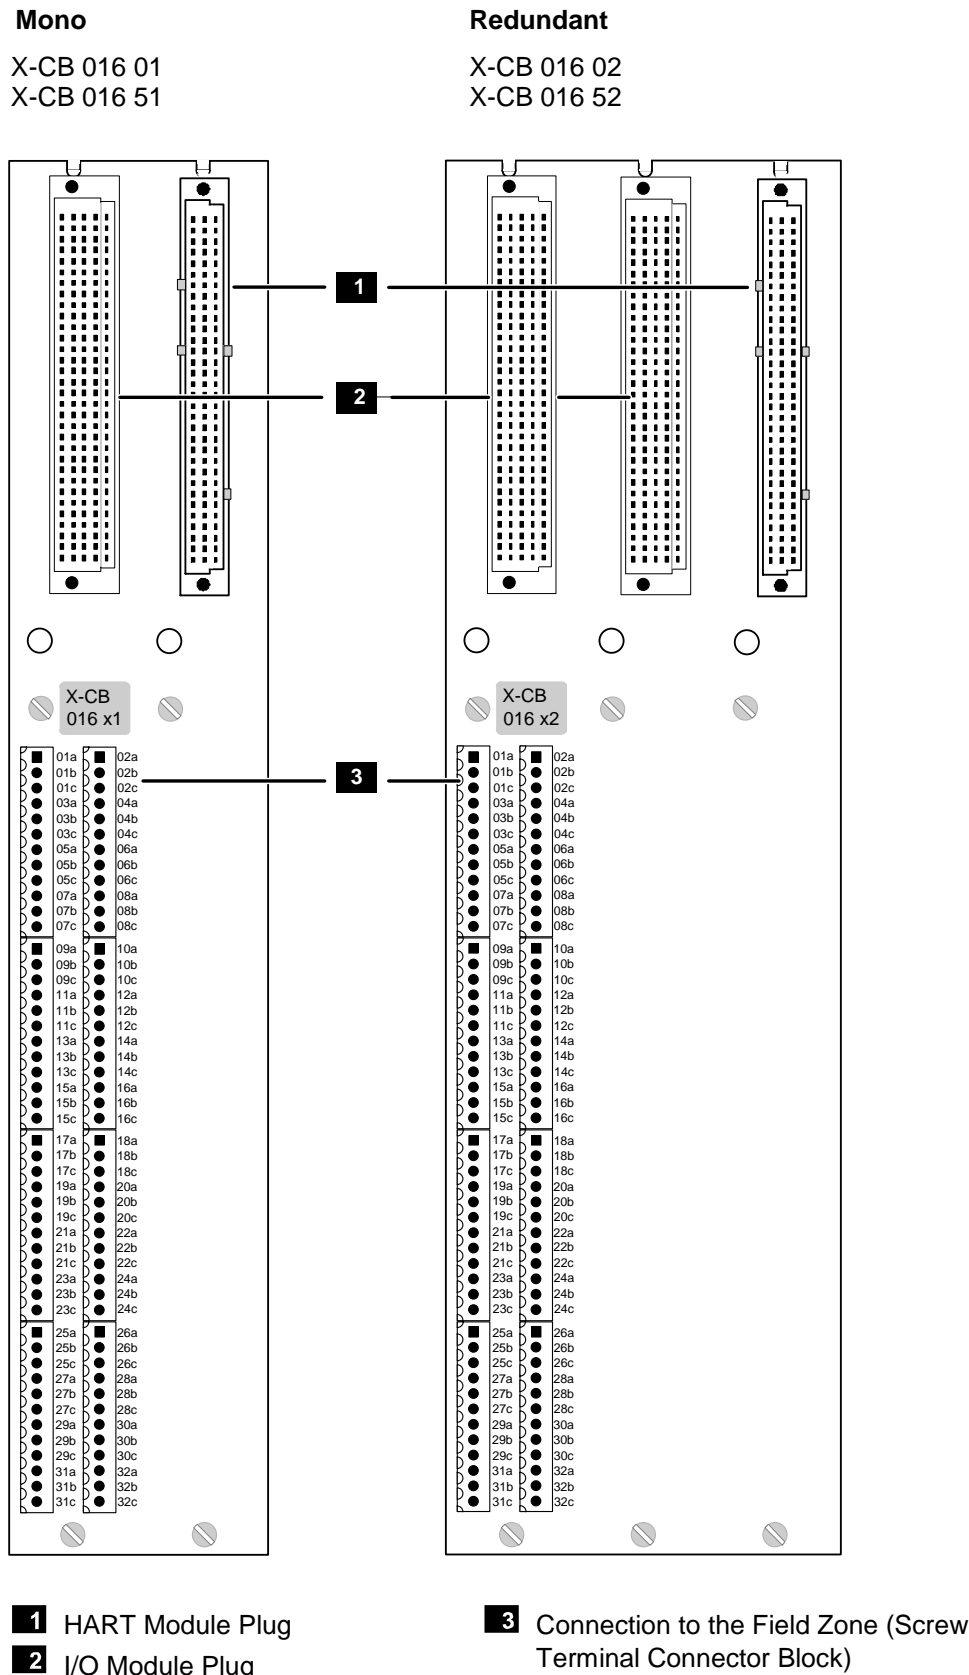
X-CB 016 Connector Boards with Screw Terminals
